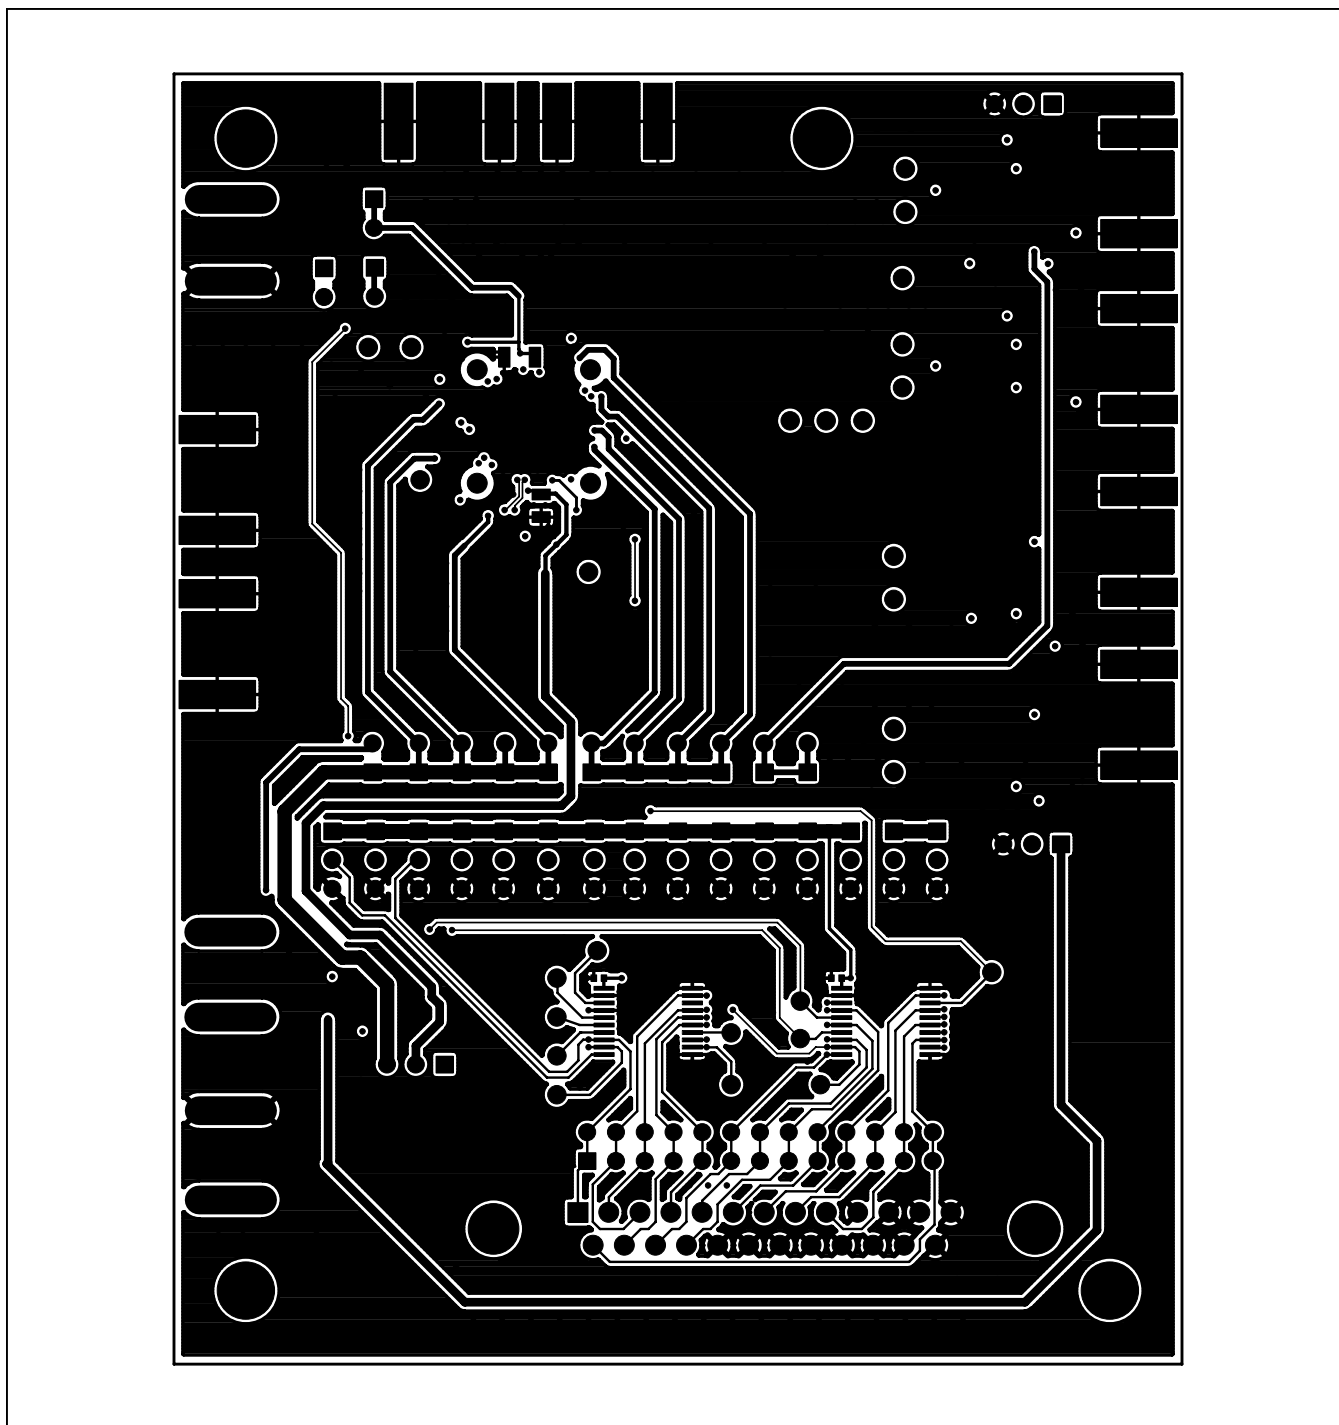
MAX2831 EV Kit PCB Layout—Solder Side
